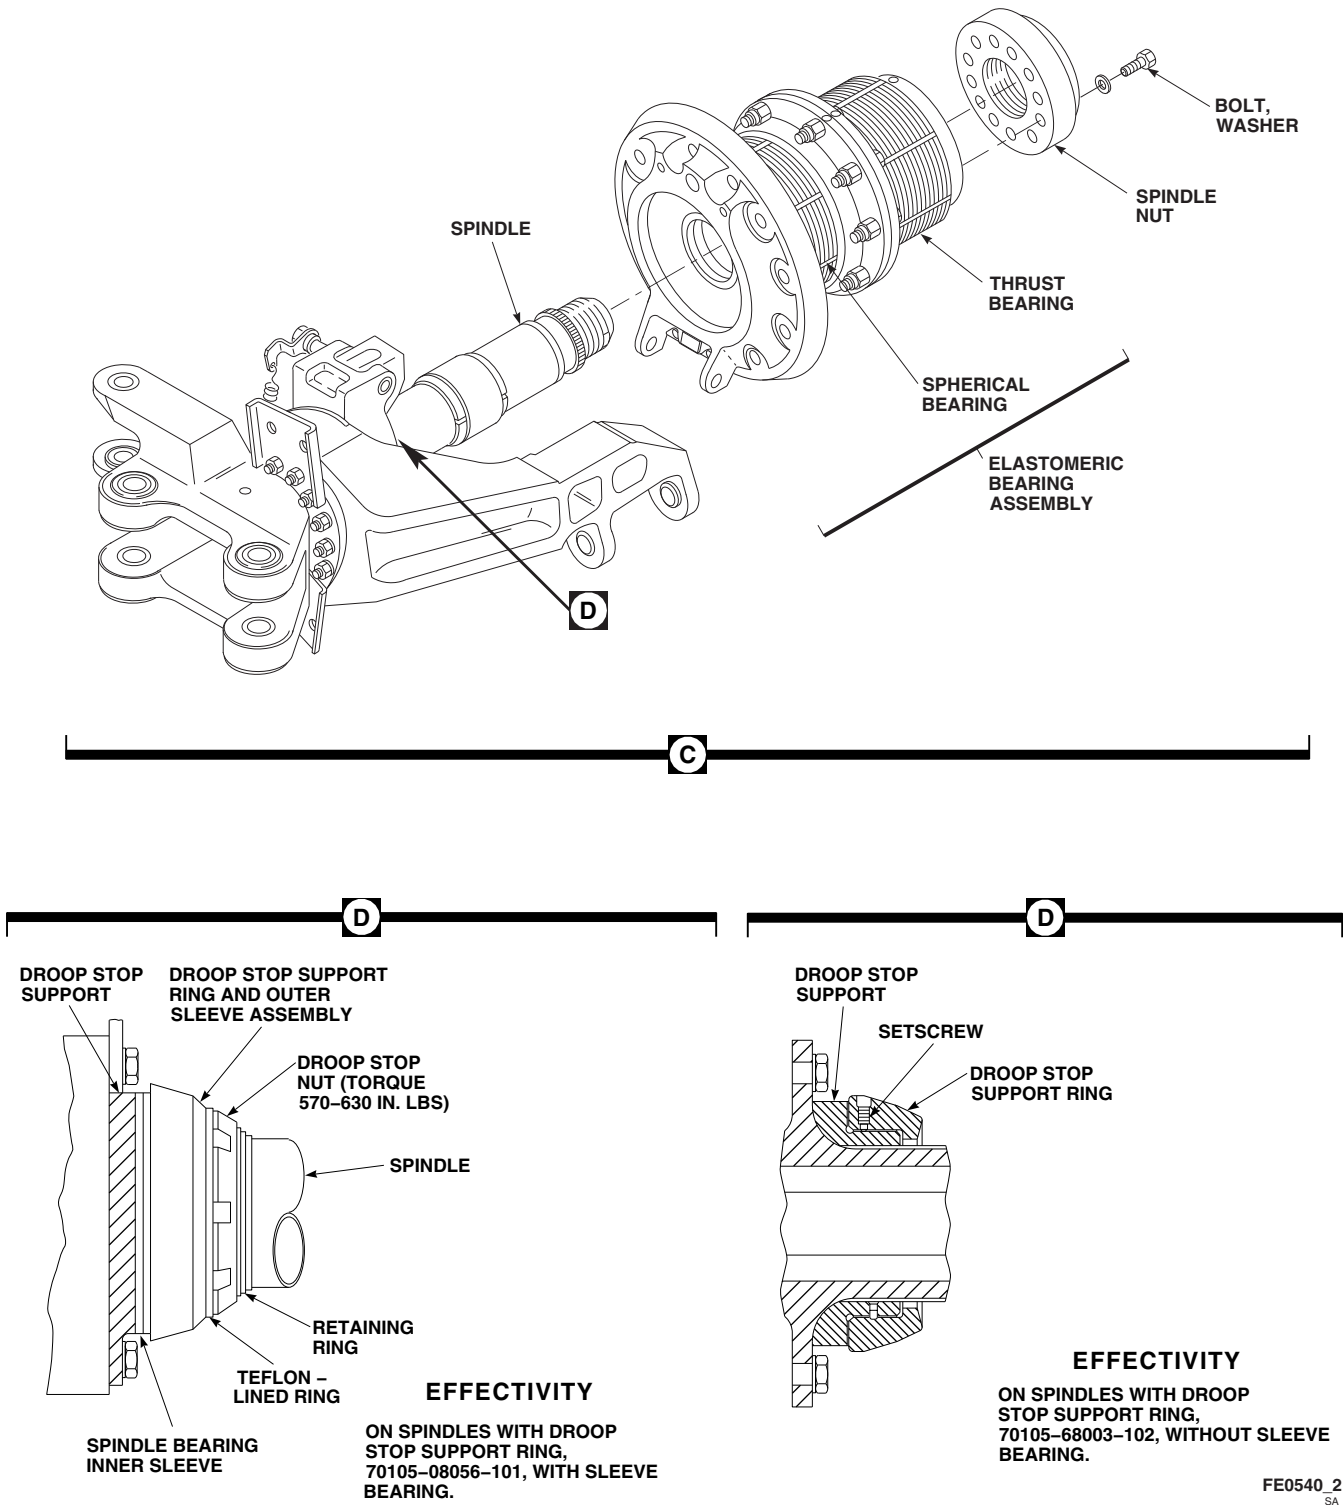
DISASSEMBLE SPINDLE (SHEET 2 OF 2)
